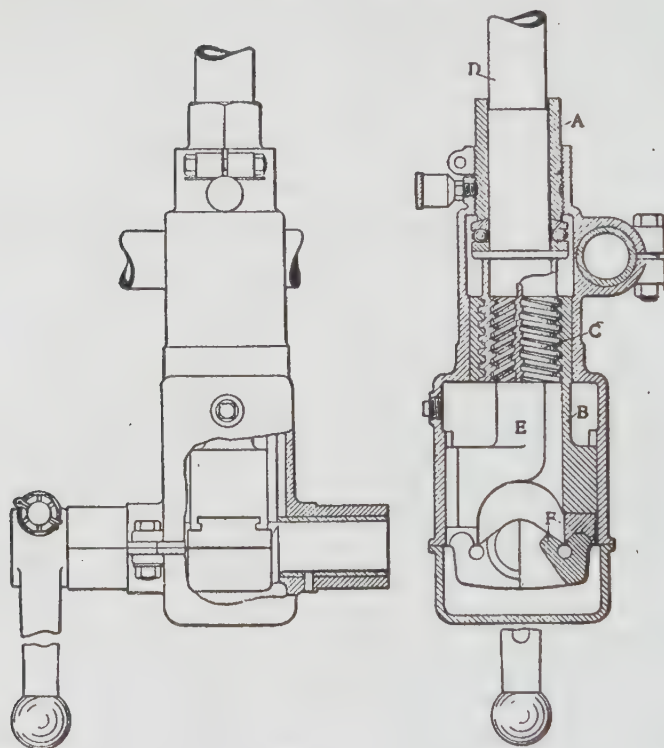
DOUBLE SCREW TYPE STEERING GEAR.
